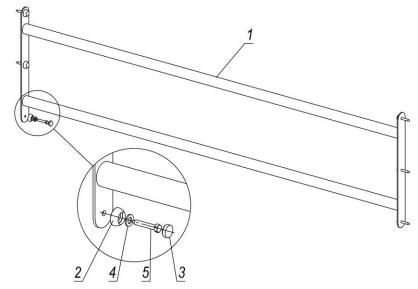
Between the 1.5m towers (2.5-2.95m beams) and the double towers (1.9x1m), place tunnel crossings.
